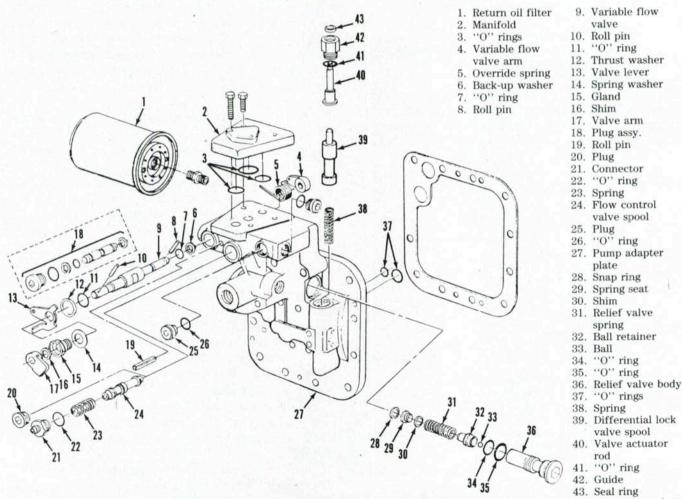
Exploded view of hydraulic pump adapter plate and valve assemblies. Adapter plate (27) is serviced as a complete plate and valve assembly only; all other parts are available separately. Plug assembly (18) is used in place of variable flow valve (9) on tractors not equipped with hydraulic lift.
